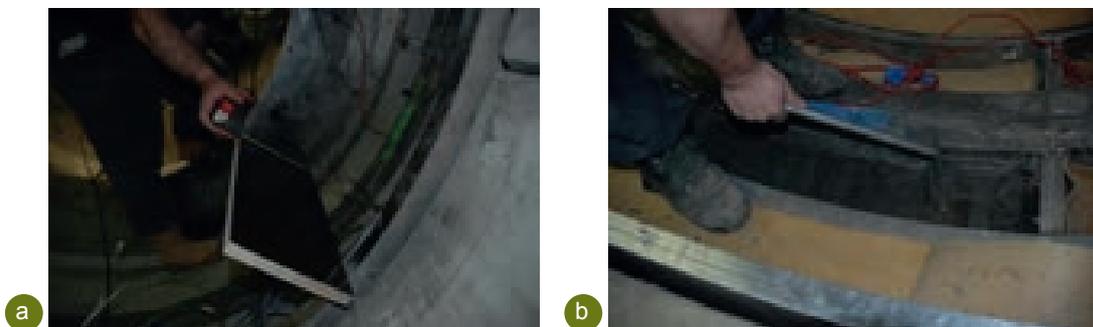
(a) A measuring tool was made that could be placed over both flanges to get a reference against which the position of the blocks could be measured; (b) Scraping of clay.
